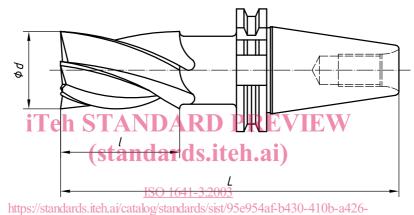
Milling cutters with 17/24 taper shanks for automatic changers
